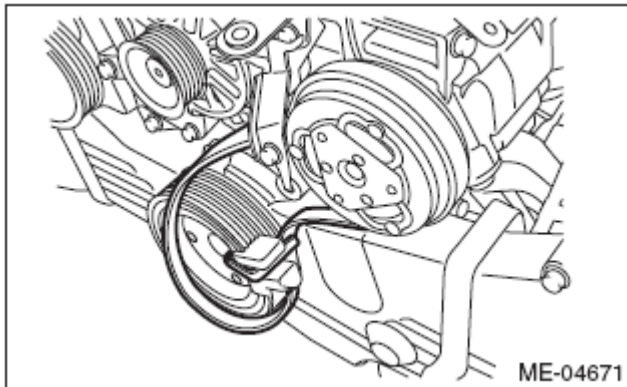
Placing Rear Side Belt To Crank Pulley Groove
